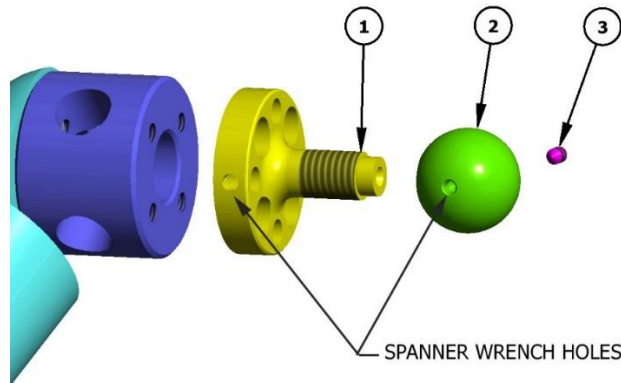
Parts list for femoral neck assembly, W50-51034.
